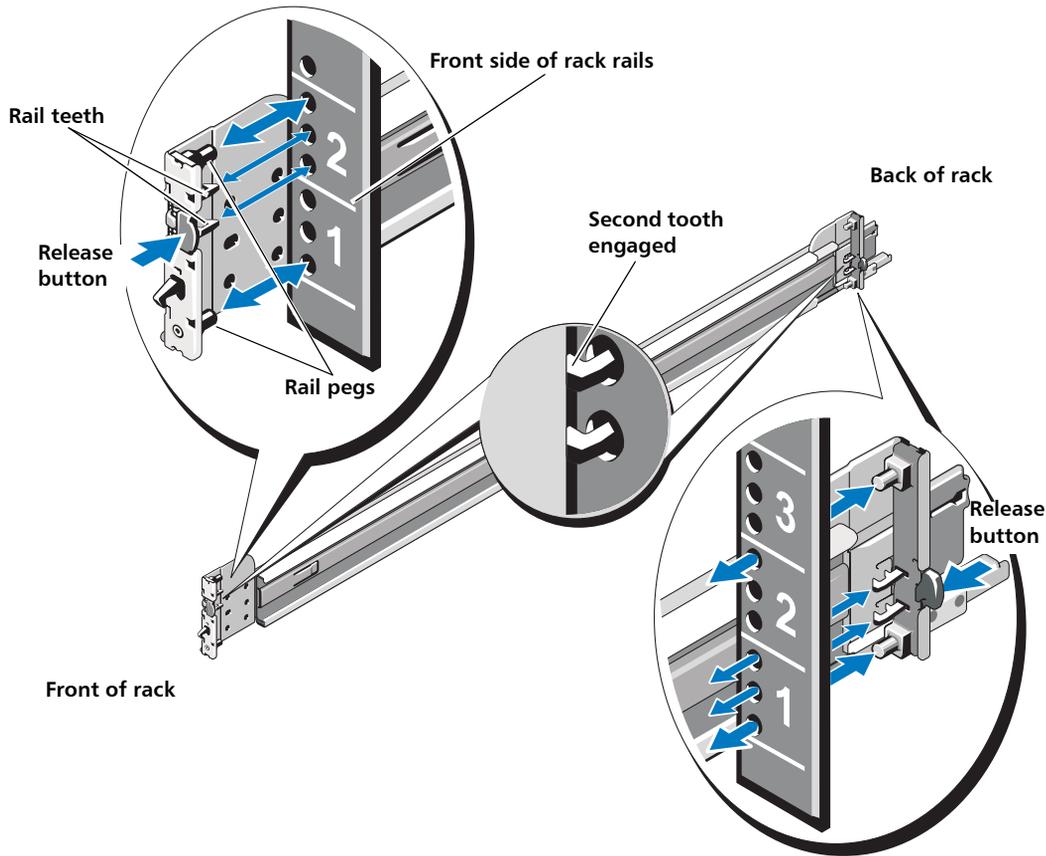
Installing the Rack Mounting Rails (Round Holes)—Right Side Rail view
